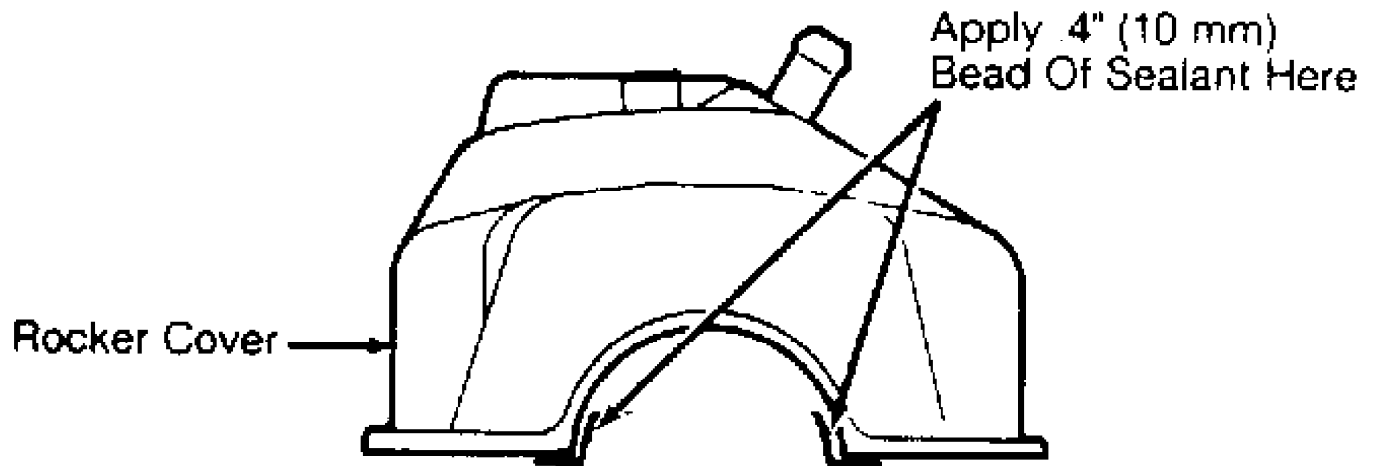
Applying Sealant To Rocker Cover (SOHC)
